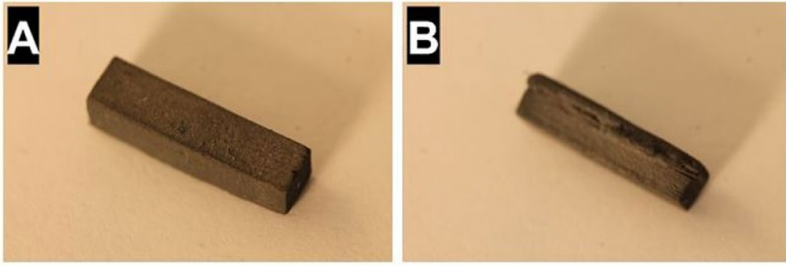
Side view of sinter-HIPed specimens: (A) 50_60; (B) 100_90.
